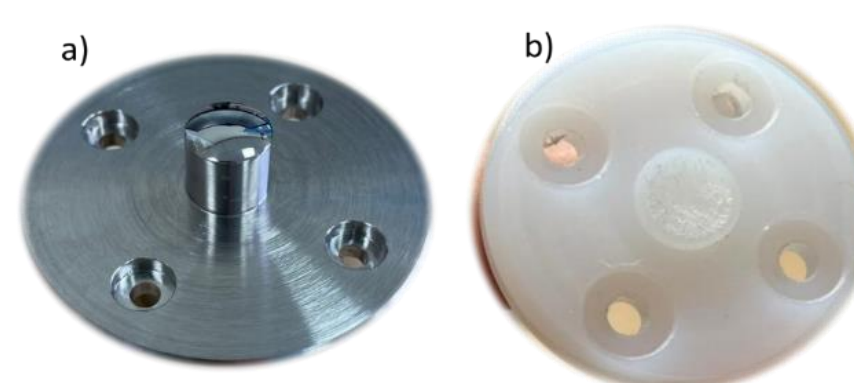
Custom-designed a) convex low carbon CoCr bearing b) UHMWPE concave bearing
